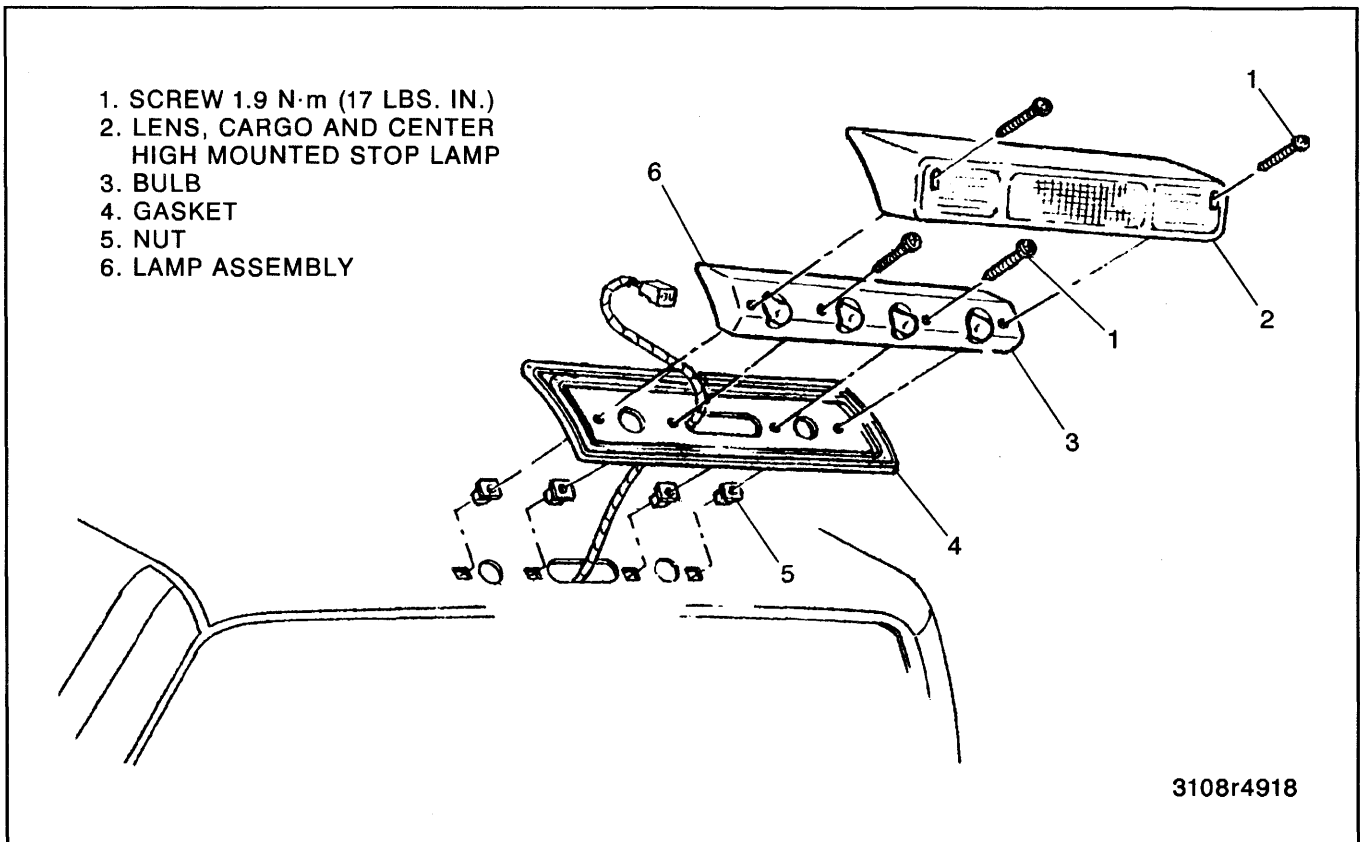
Cargo/Stoplamp Components (Pickup and Cab/Chassis Models)
